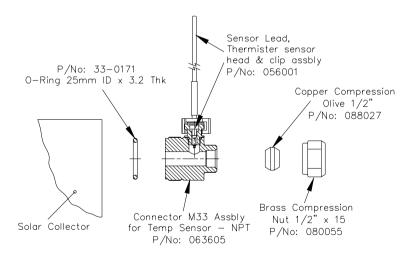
#### DETAIL E - COLLECTOR UNION ASSEMBLY - SCREWED FITTING
